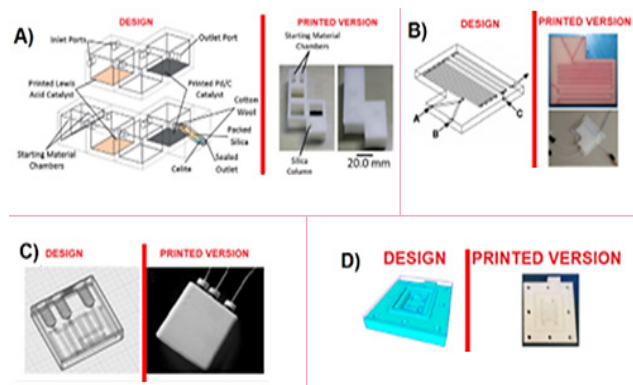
(a) Design and final version of a 3D-printed sequential reactor, (b) Final design and version of a 3D-printed miniature fluid reaction device, (c) Final design and version of a 3D-printed conical distributor and a reactor that are both integrated used for biodiesel synthesis. (d) Design and final version of a 3D-printed electrolyzer cell component for water splitting [5].
